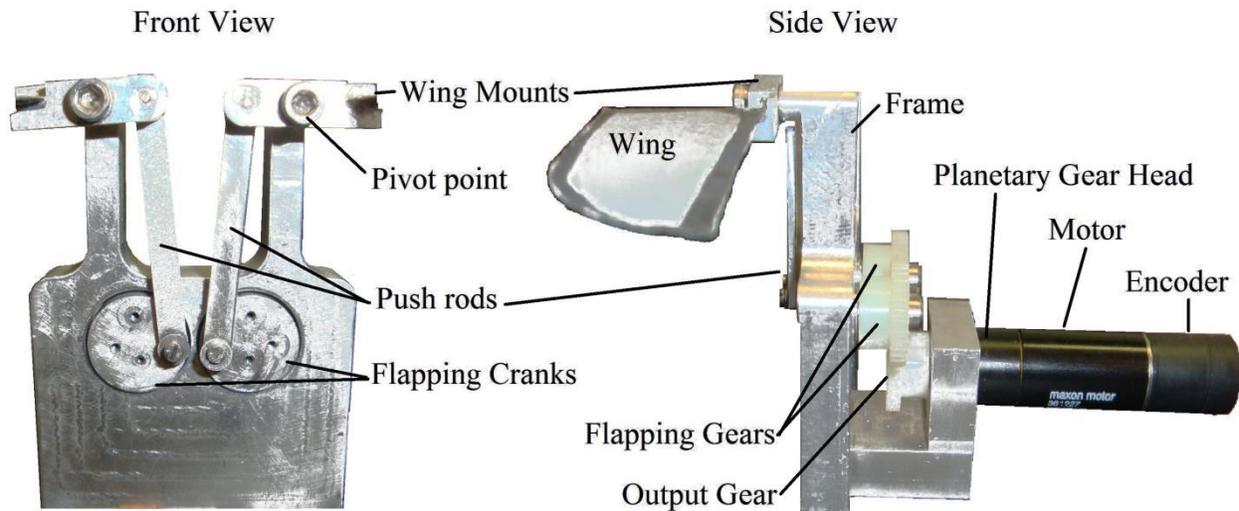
Flapping Mechanism 3 furnished with aluminum frame and fewer parts.
